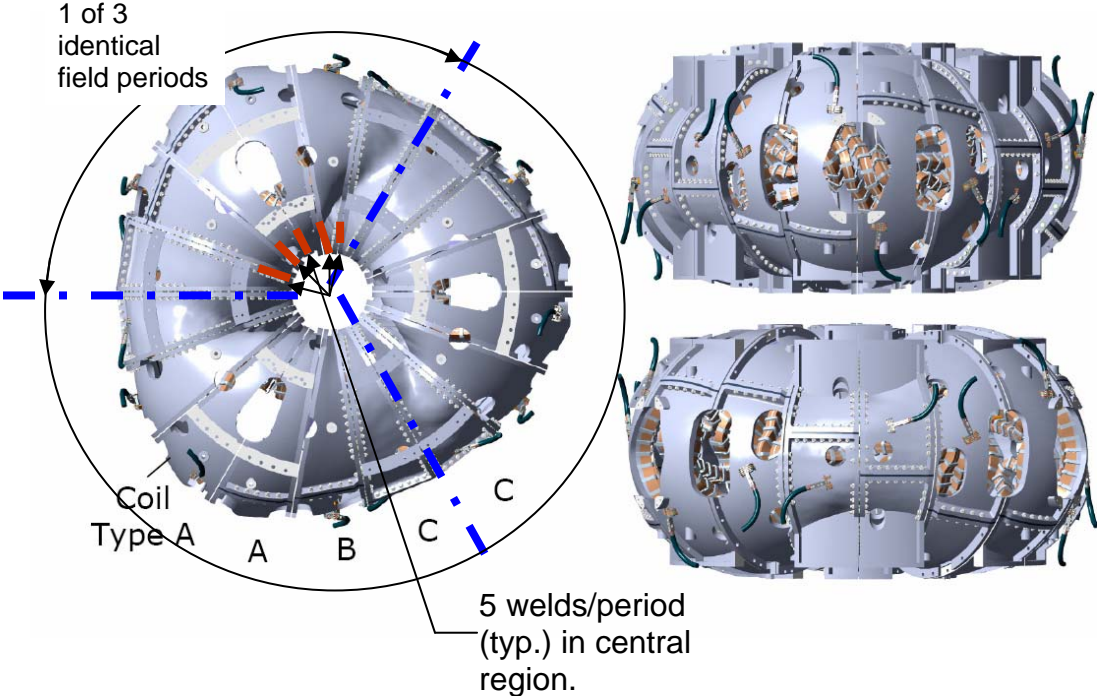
NCSX Modular Coil Weld Interfaces
